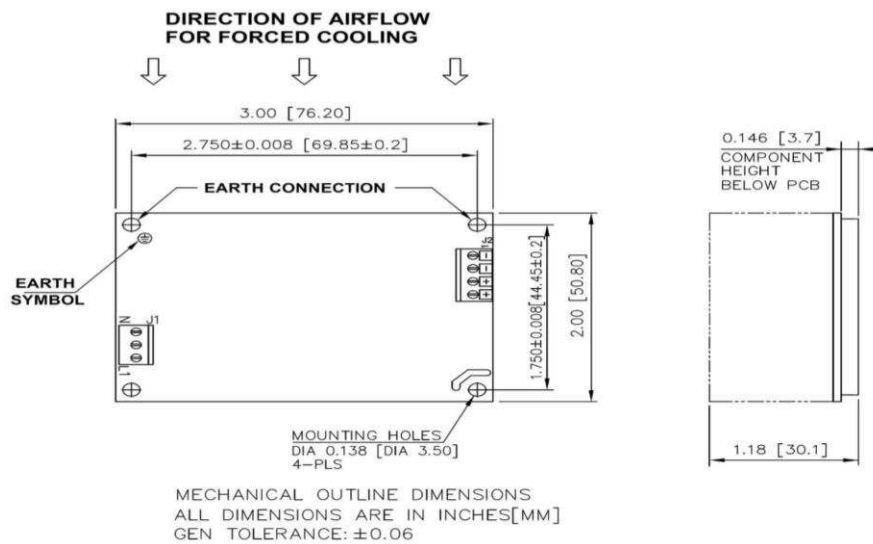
Mechanical Drawing - Screw Terminal (Option 1)
